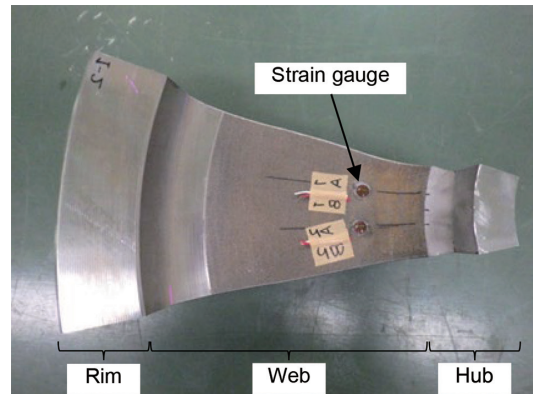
Example of photo of cut wheel for fatigue test⁶⁾
